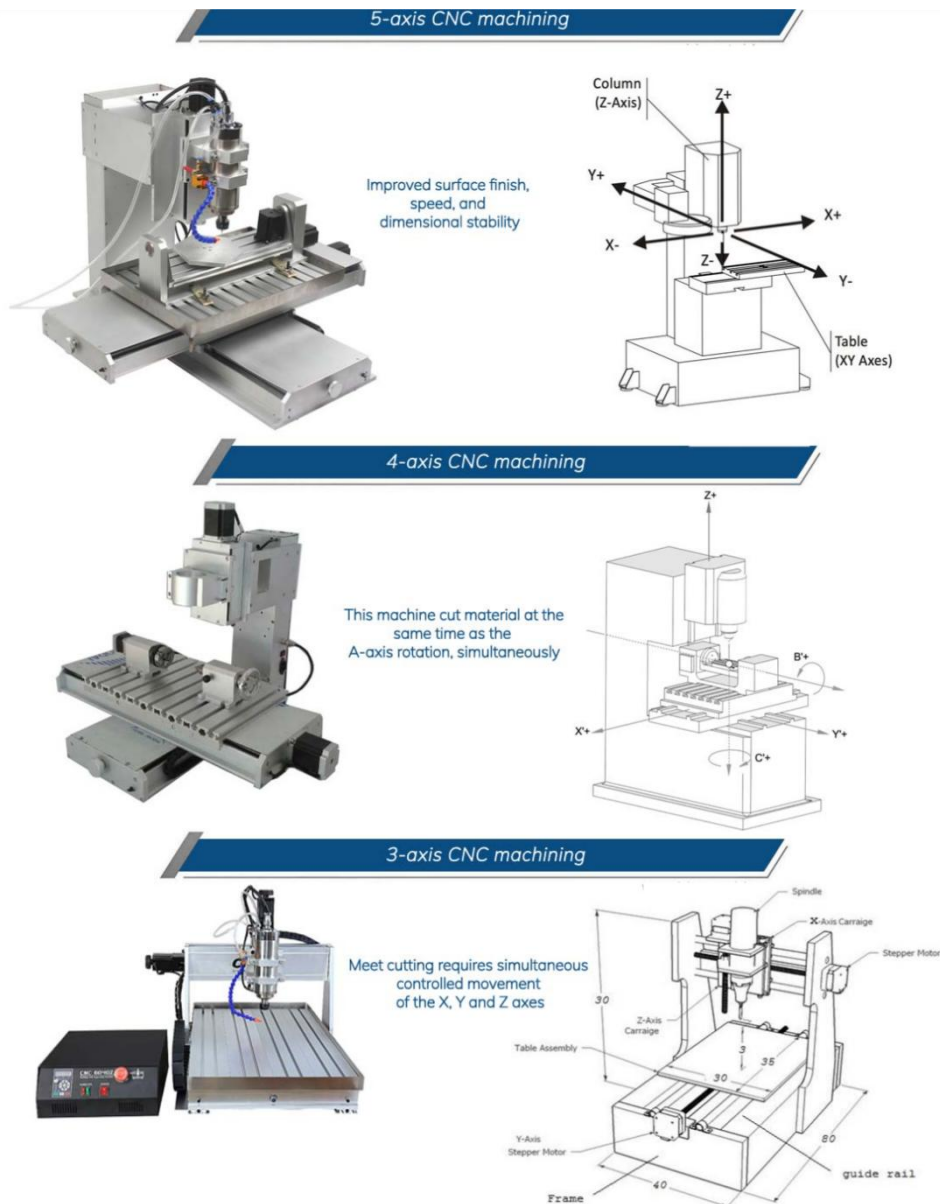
Comparison chart of three-axis, four-axis and five-axis CNC milling machines[19]
